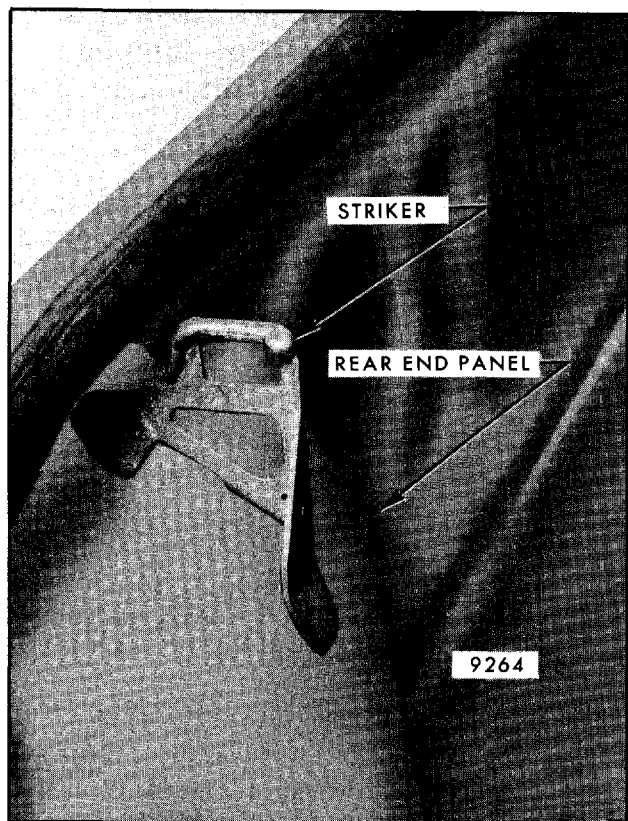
"B, C" Deck Lid Lock Striker
